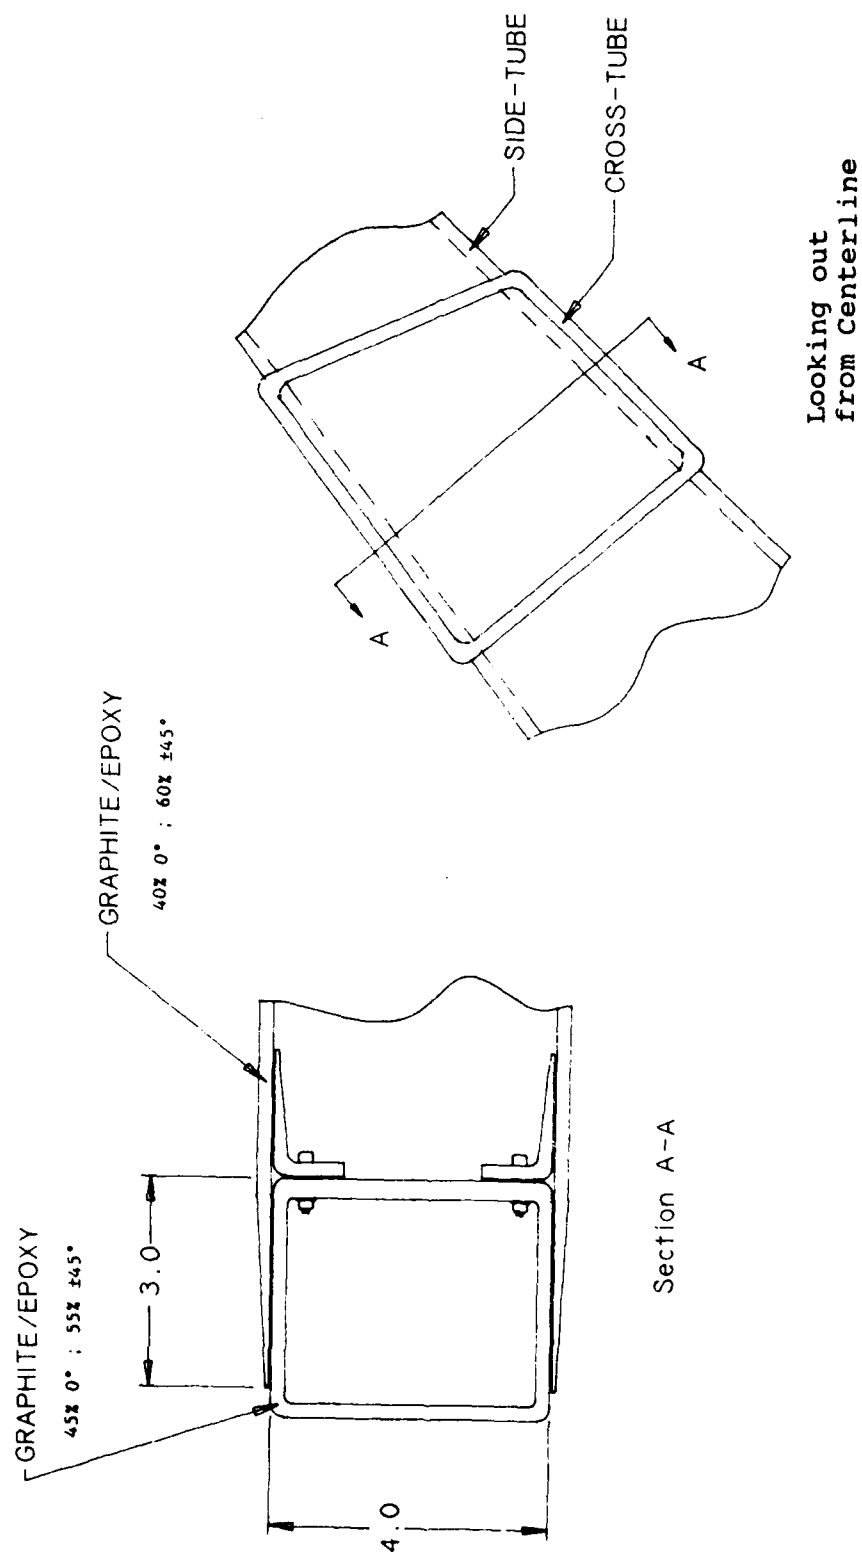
Intersection of Cross-Tube and Side-Tube.
